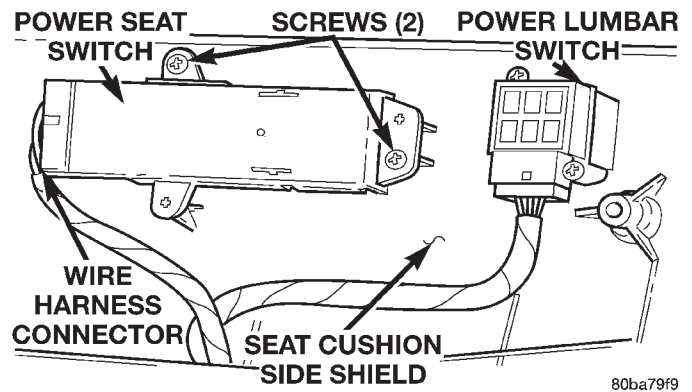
Ten-Way Power Seat Switches Remove/ Install
